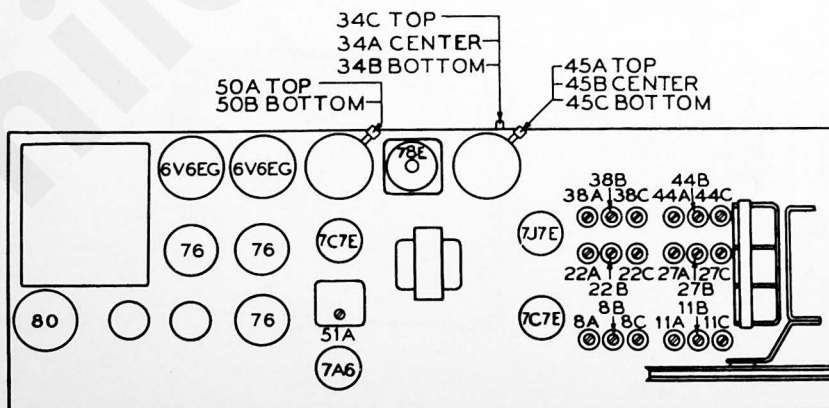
TUBE AND COMPENSATOR LOCATIONS—TOP OF CHASSIS
